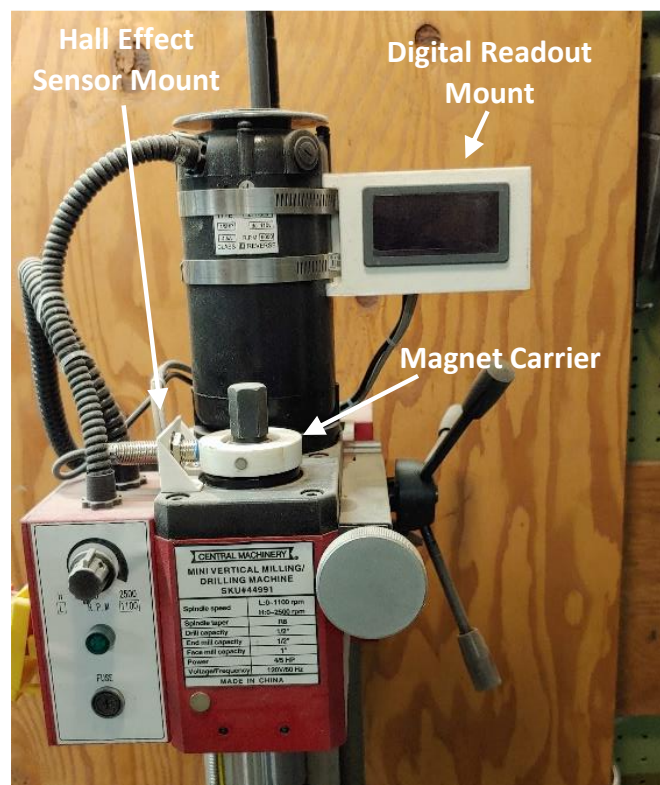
3d Printed Parts Adapt New Components to Old Machinery. Here I modified my Harbor Freight mill to include a generic Hall effect tachometer and readout.
